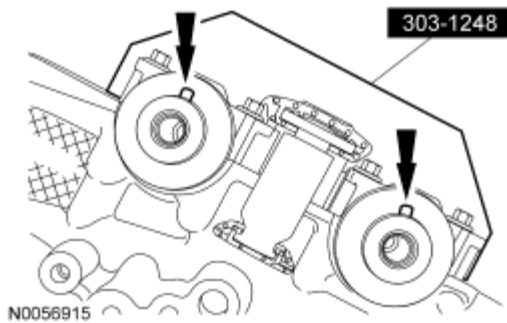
Installing Special Tool (303-1248) On Flats Of Camshafts
